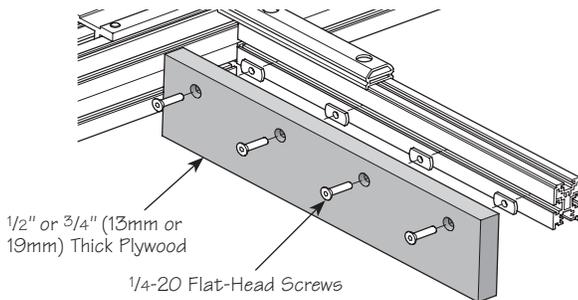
Wooden lower strut. Remove standard lower strut assembly.
